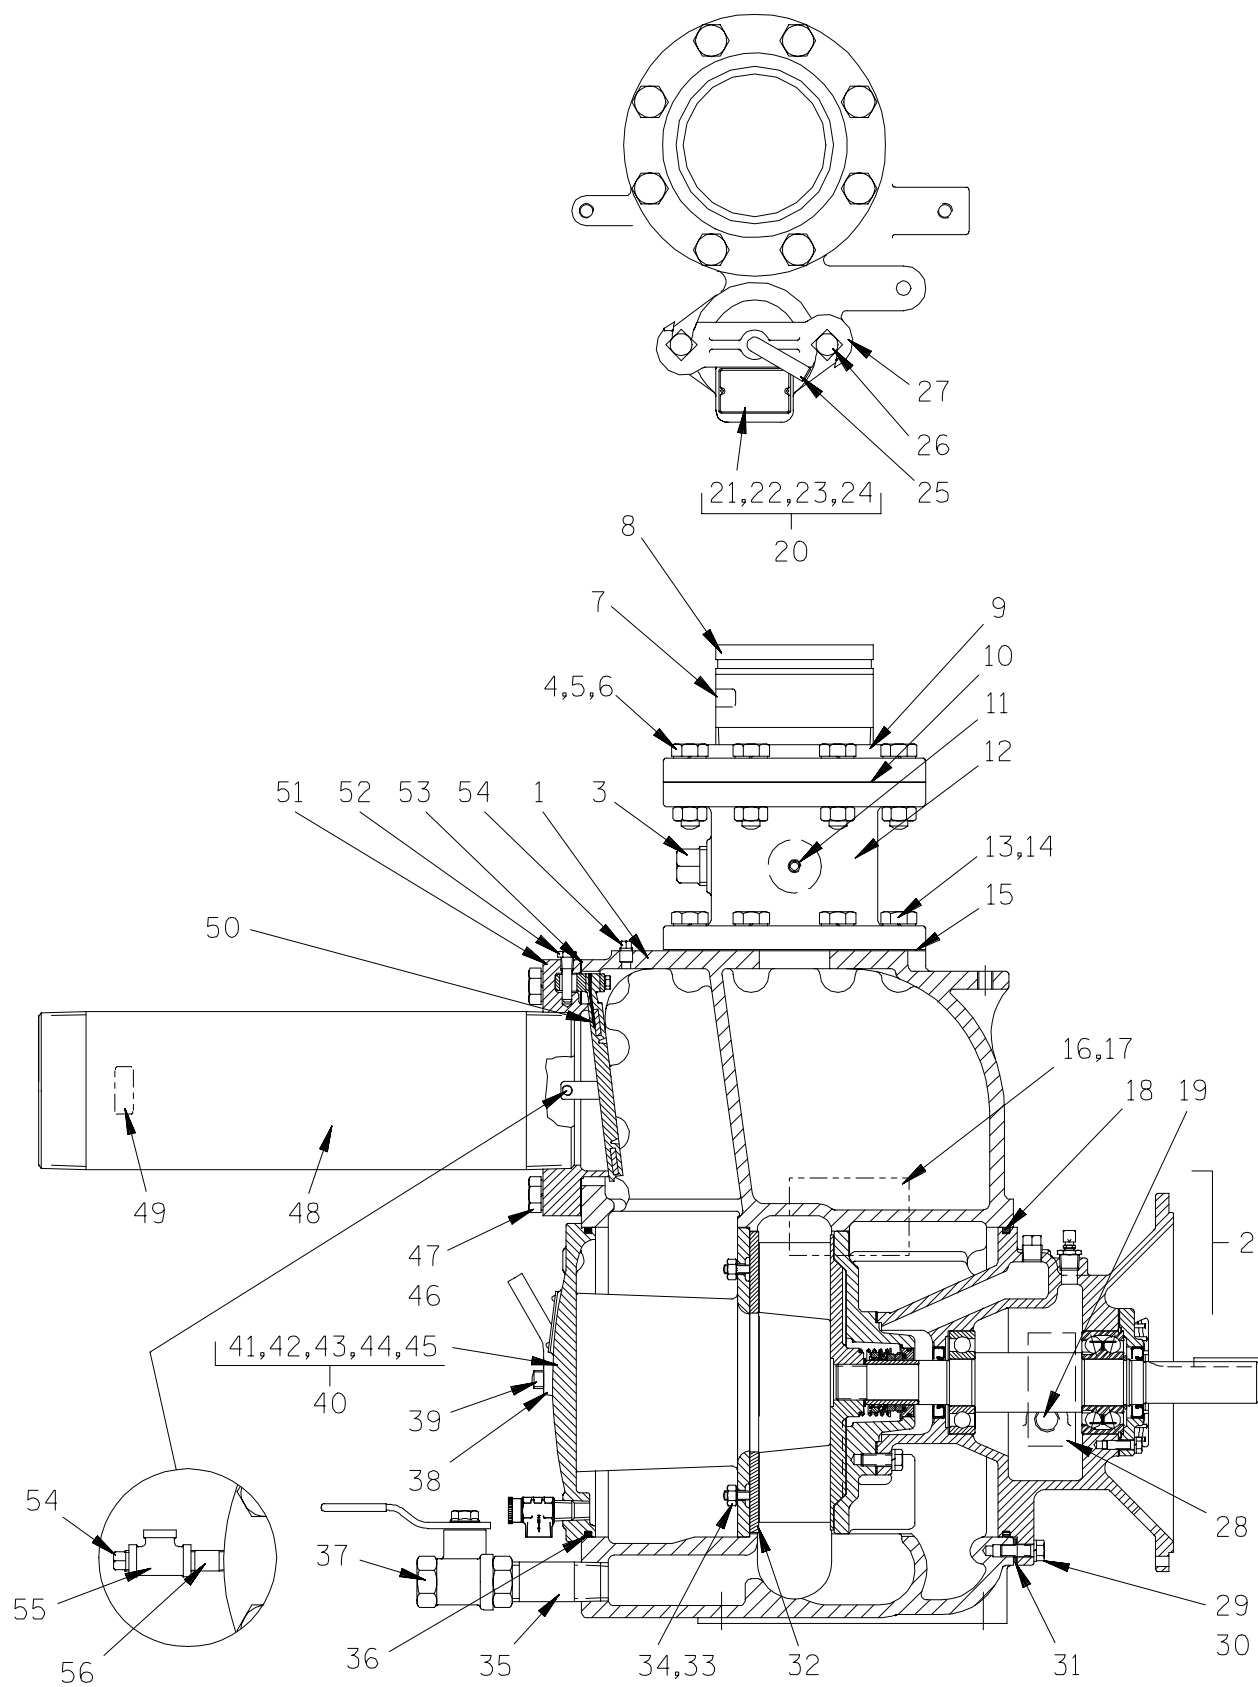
T6A3-(F4L-SP) Pump End Assembly
